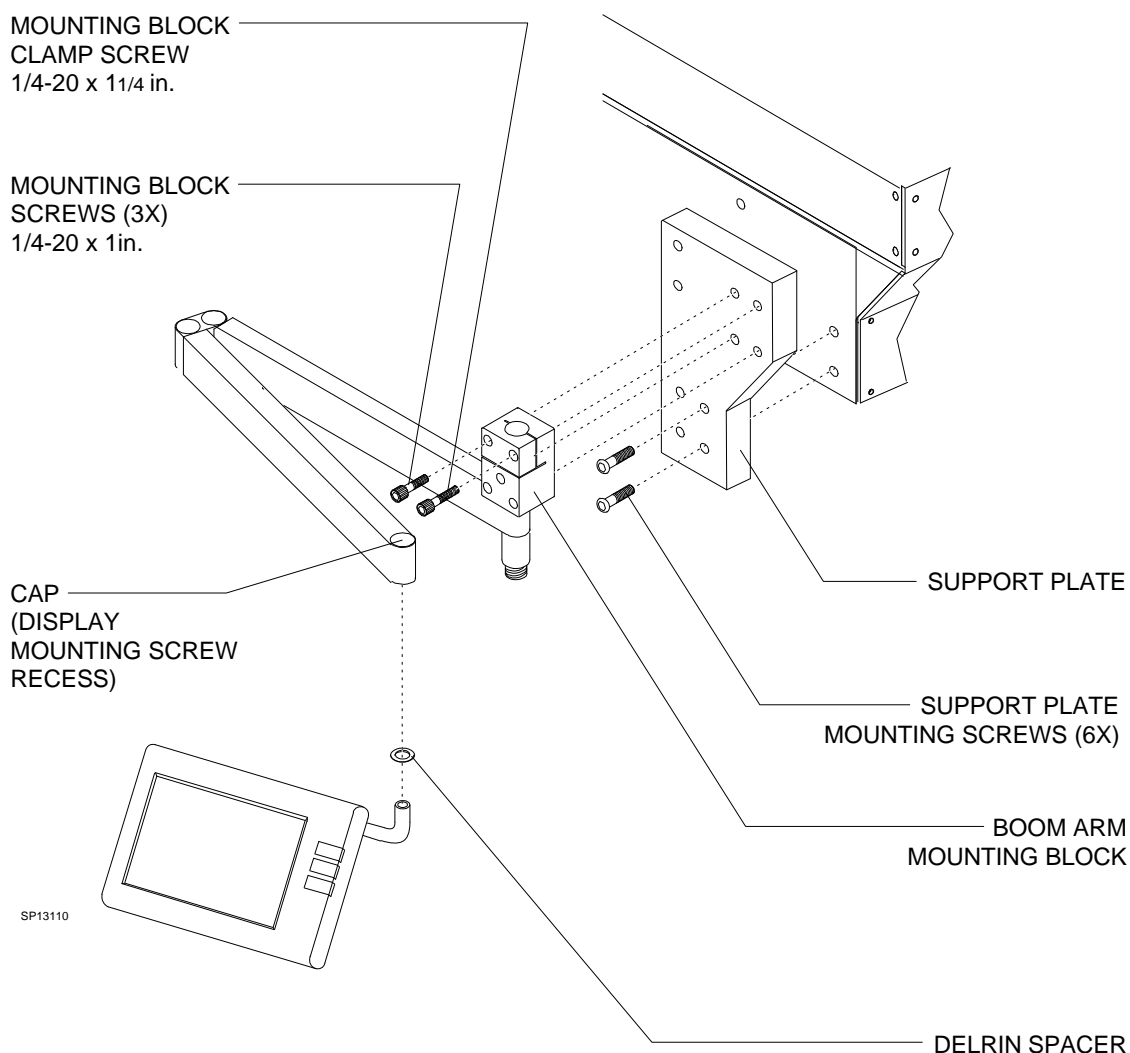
DISPLAY AND EXISTING BOOM ARM REMOVAL
